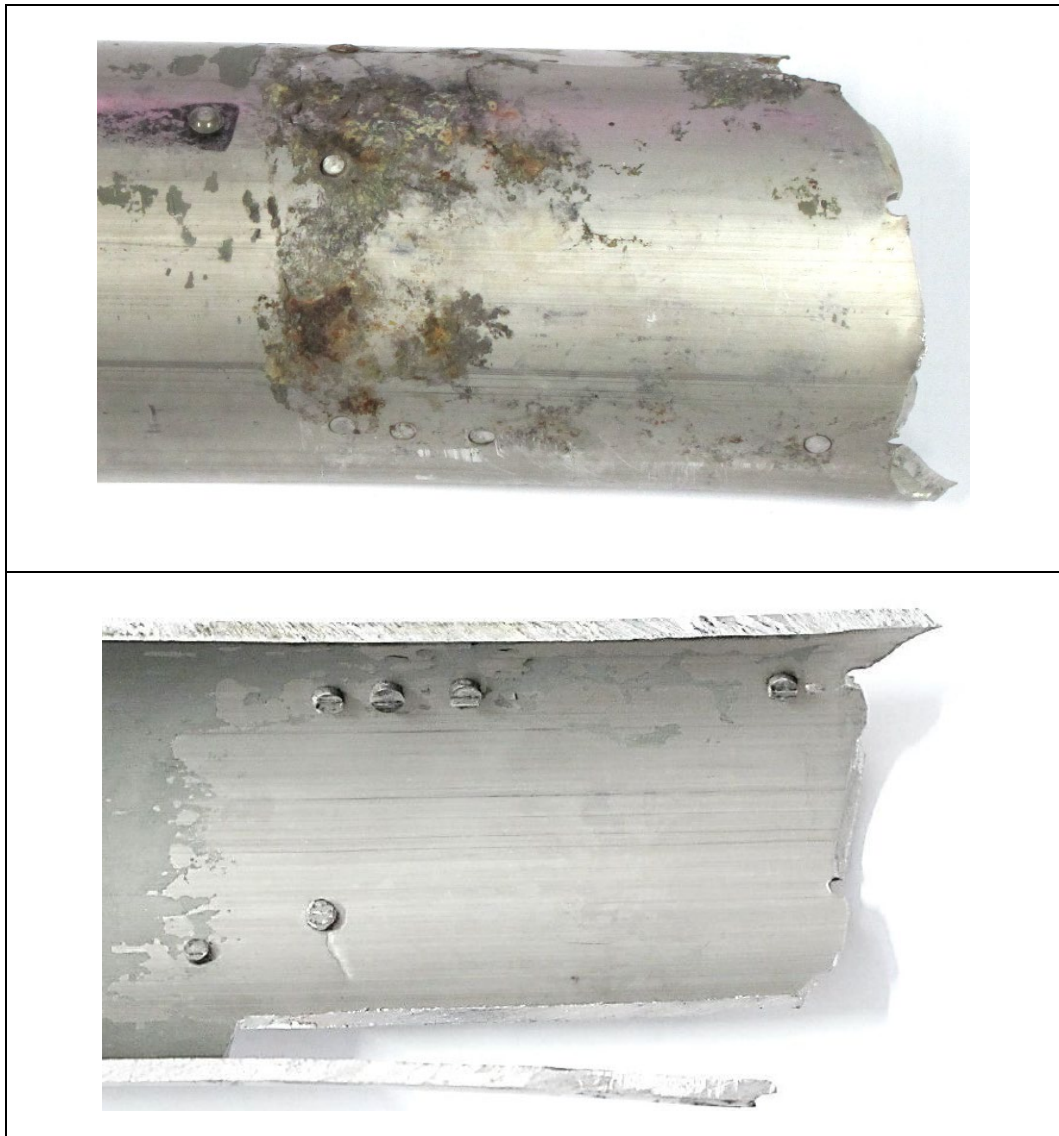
Cut open lower spar section L1 – the outer surface with corrosion and cracks, the inner surface with no signs of corrosion.
